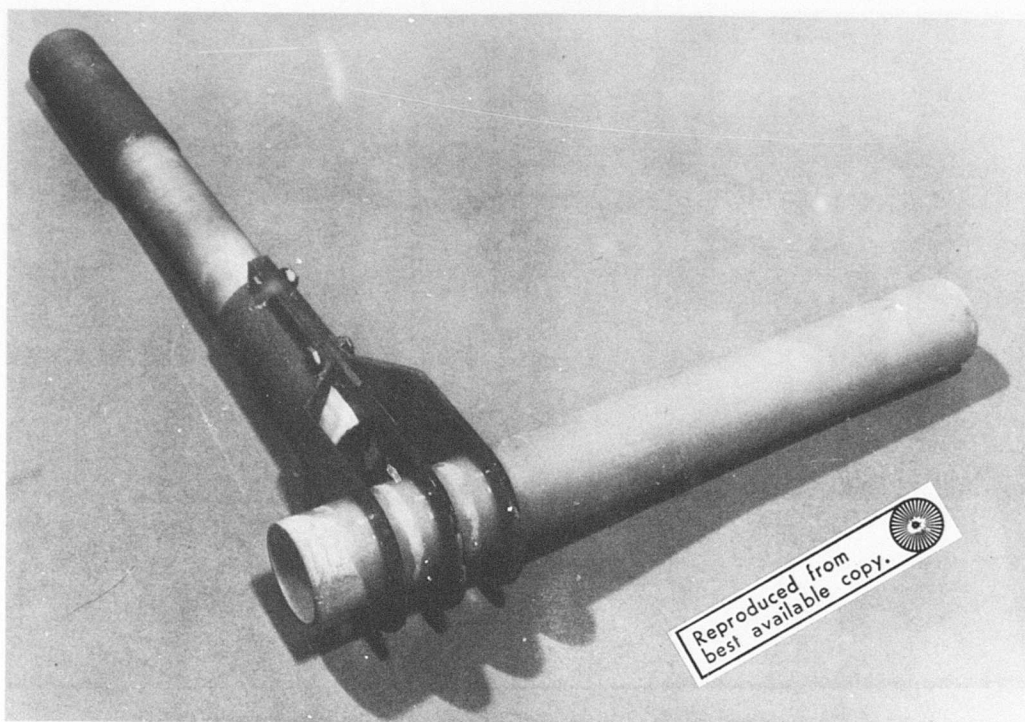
Alignment of Bearing Sleeves and Push Rod Fingers.
